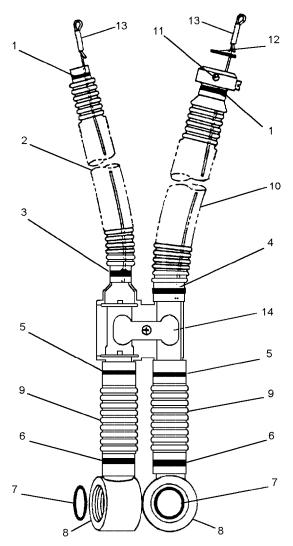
Lower Assembly - (V)2 thru (V)4 Variants
